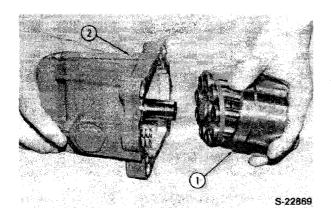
Cylinder Block (Motor) Assembly -Disassembly
